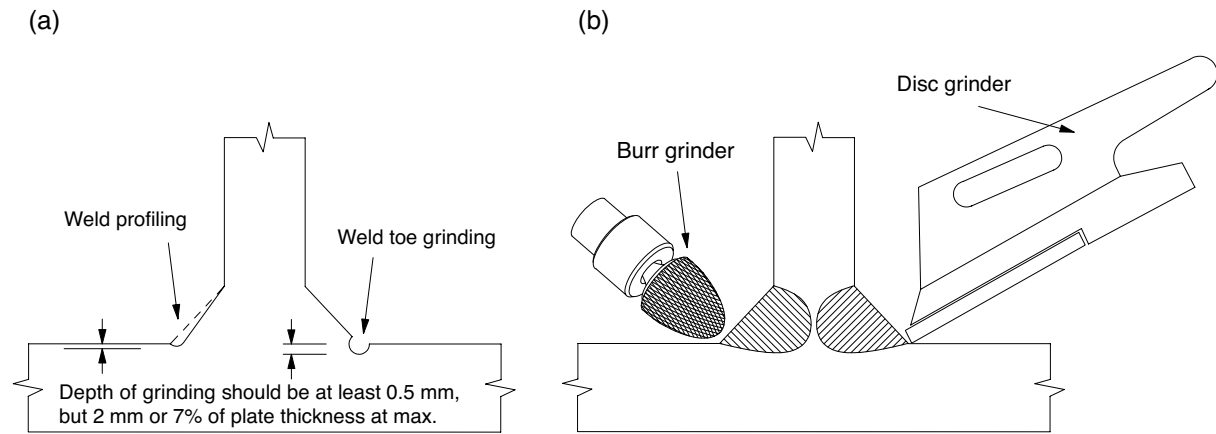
Basic principle of weld toe grinding and weld profiling, including grinding depth recommendations by Haagensen and Maddox [1] (a) and equipment typically applied for grinding (b)
